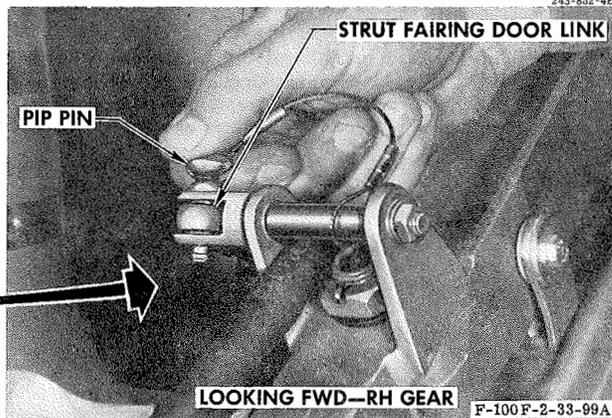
Installing General Main Gear Wheel and Brake Assembly (Sheet 5 of 5)
